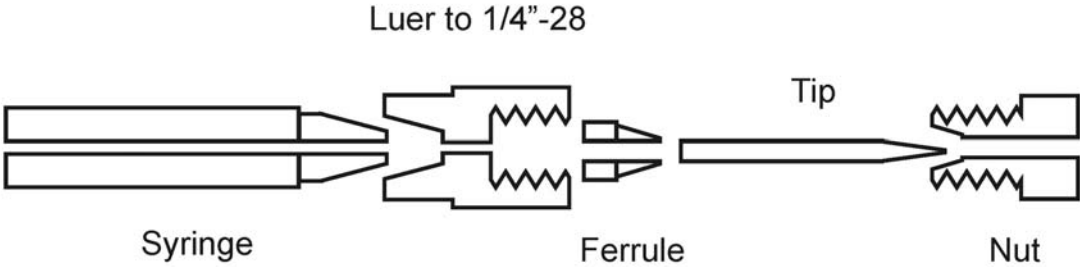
Cutaway exploded view of rapid change tip assembly.
